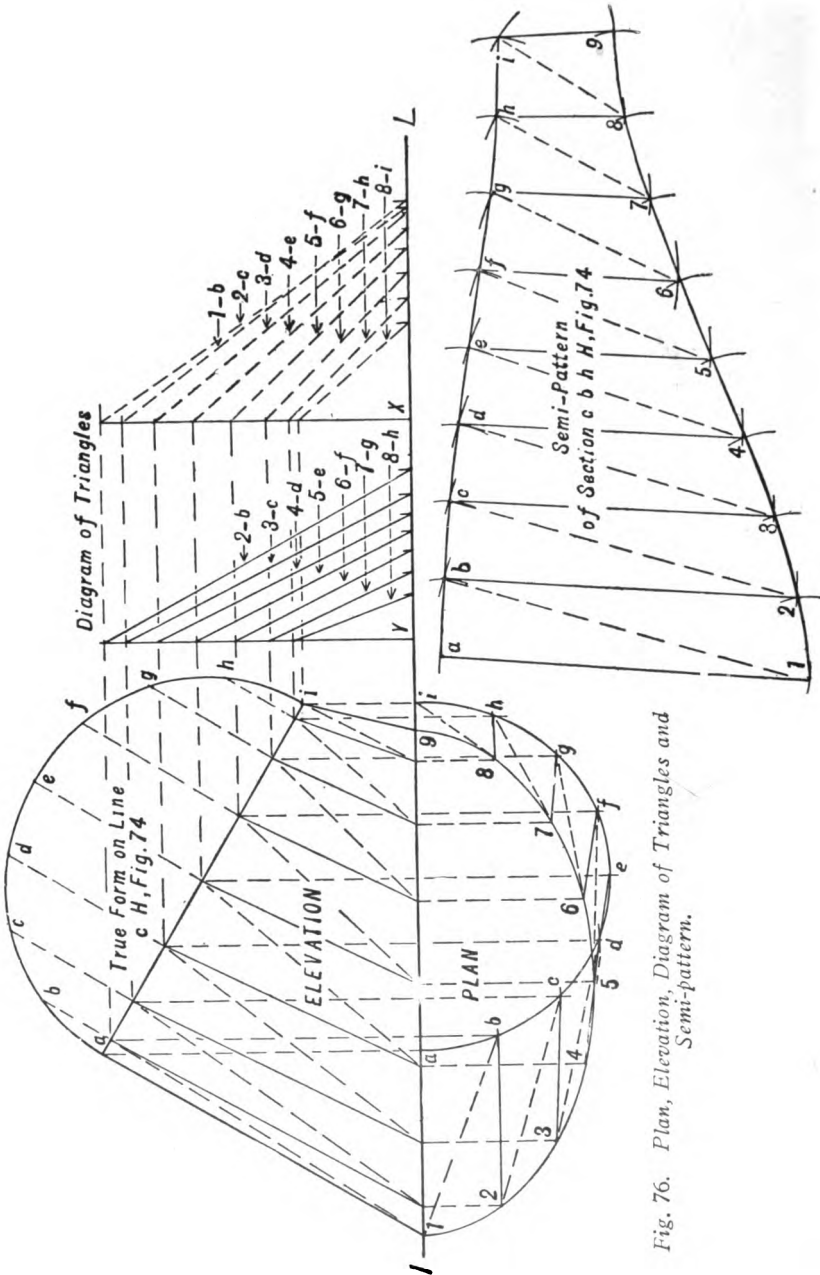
Plan, Elevation, Diagram of Triangles and Semi-pattern.
